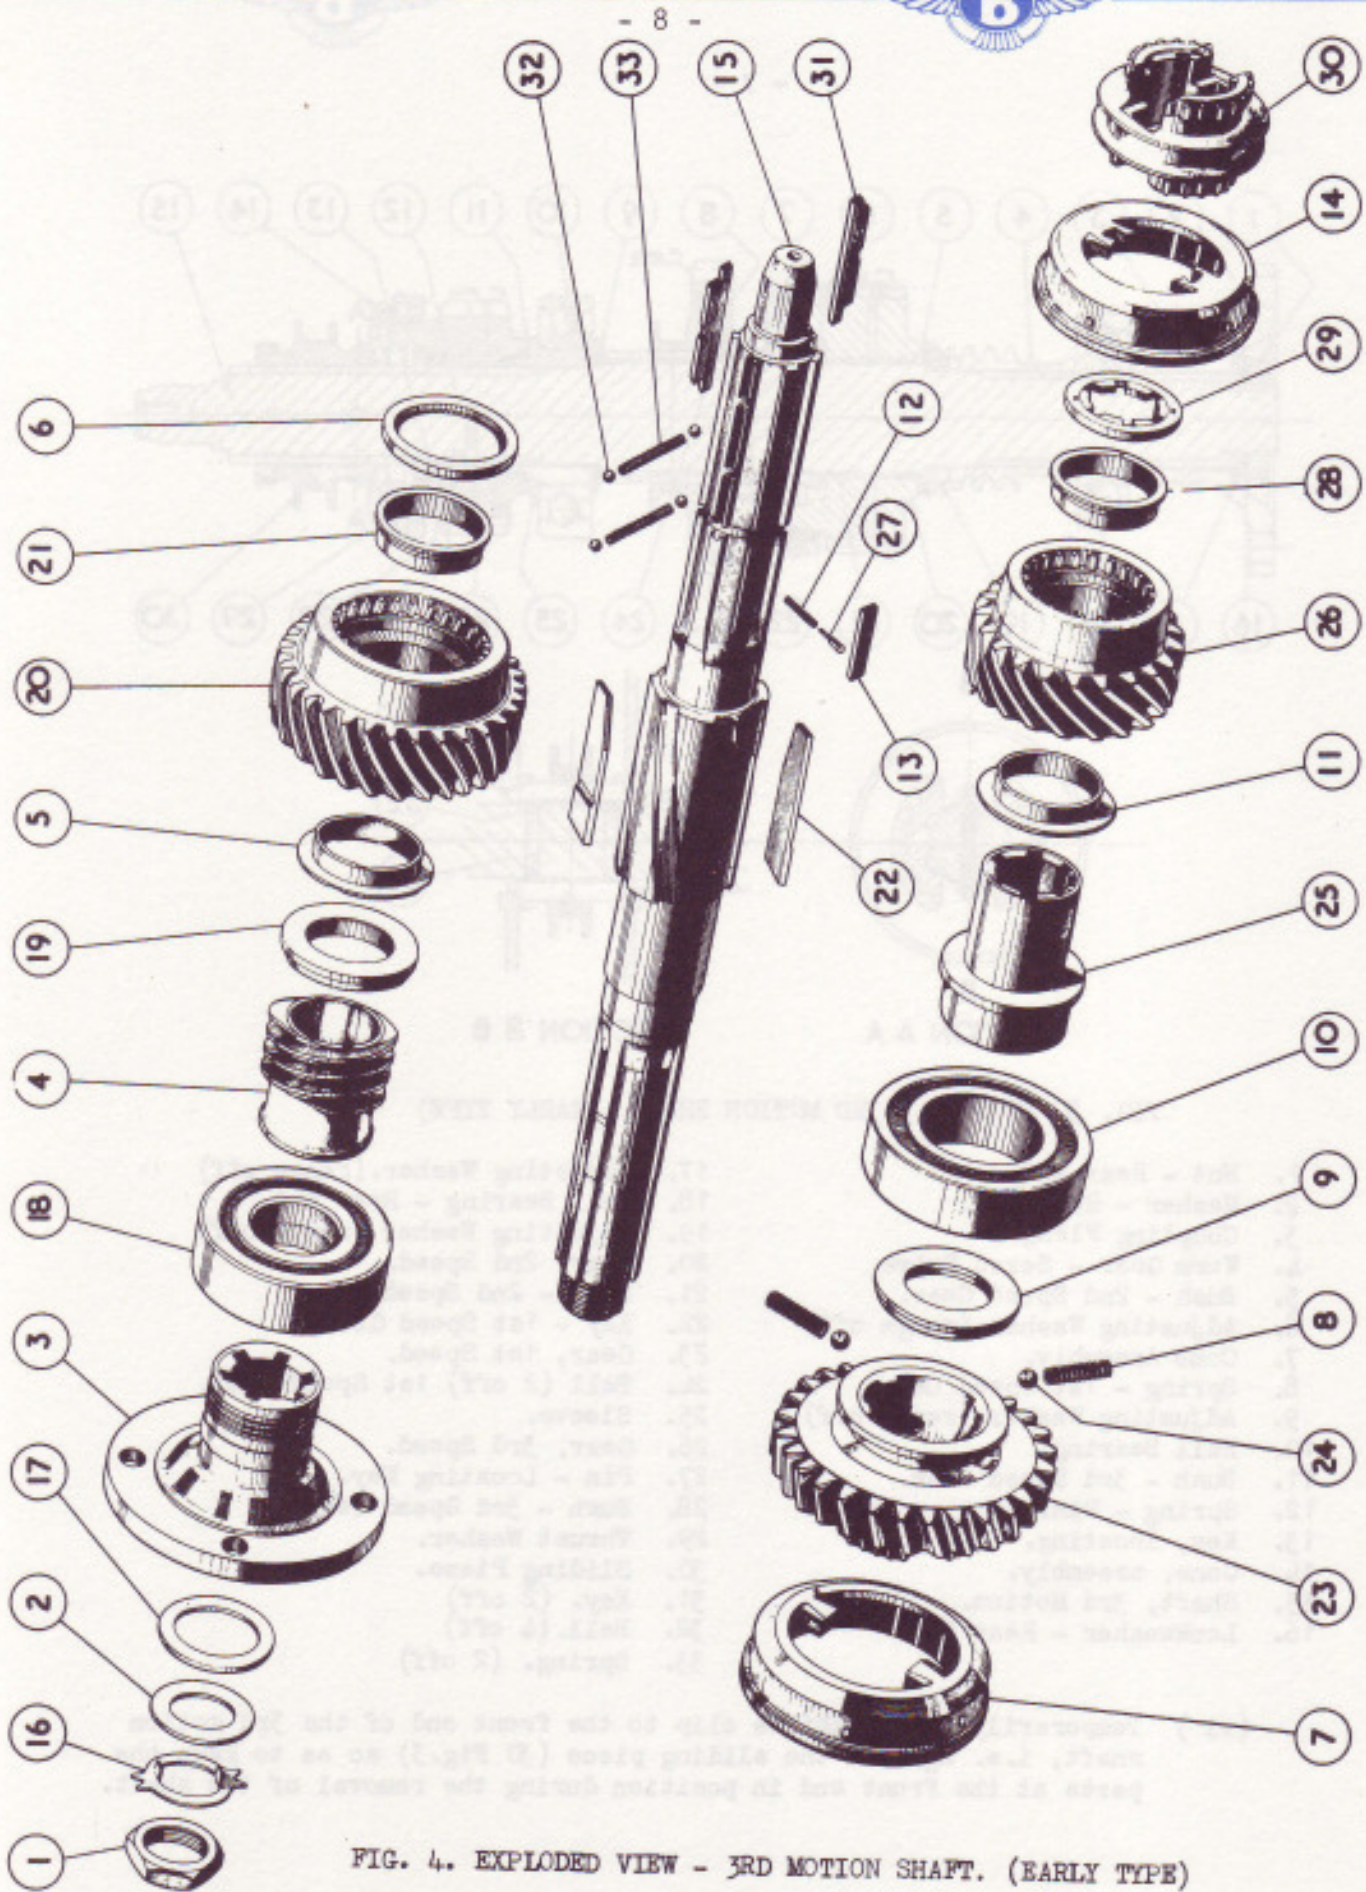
EXPLODED VIEW - 3RD MOTION SHAFT. (EARLY TYPE)
